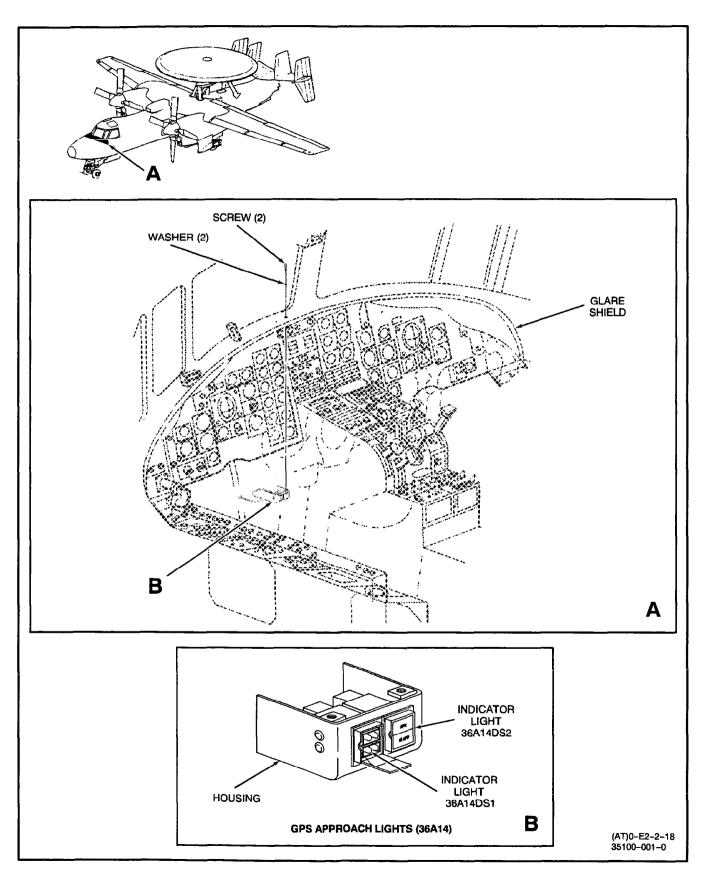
Removal and Installation of GPS Approach Lights Panel Assembly
